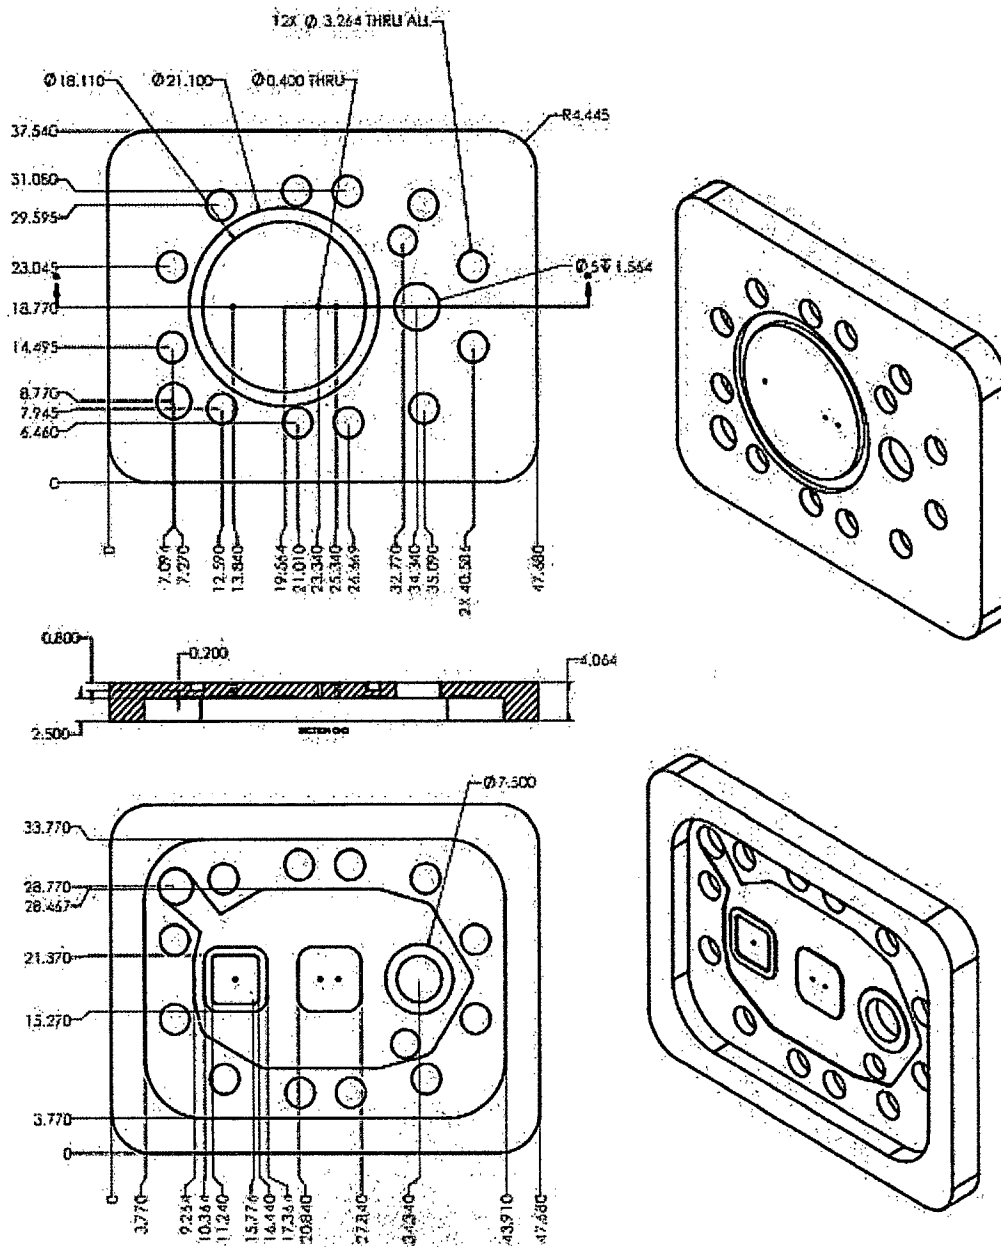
Bottom housing of 2-stage microcompressor, body 3.
